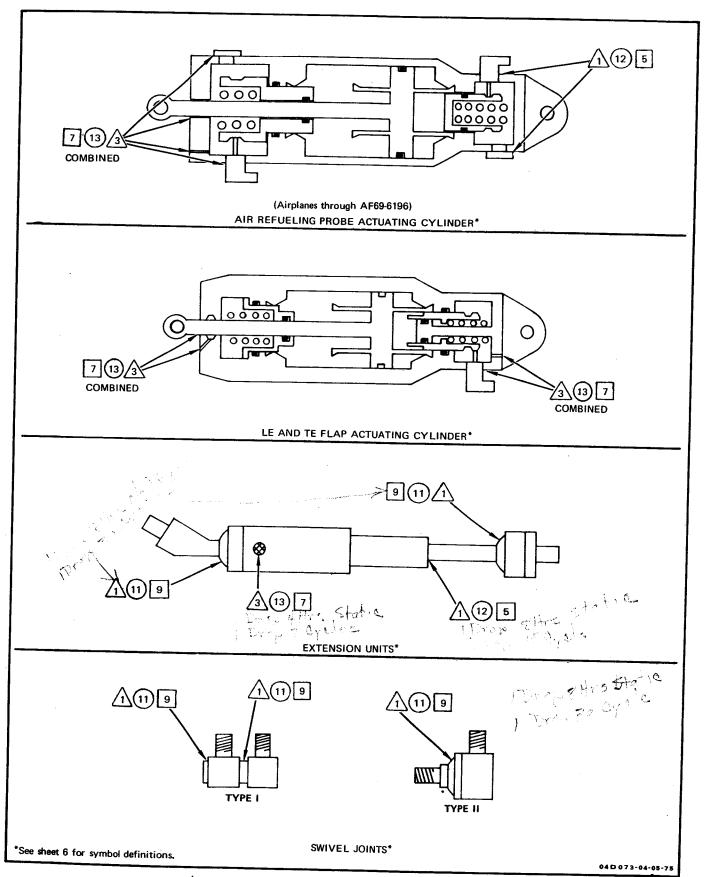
Hydraulic Component Allowable Leakage (Sheet 4)
